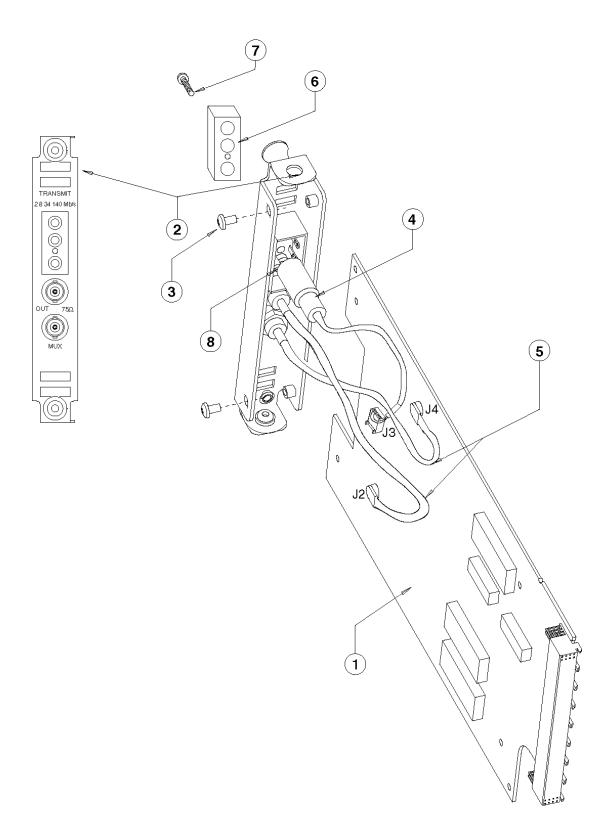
Structured PDH Transmitter Module - Exploded View
